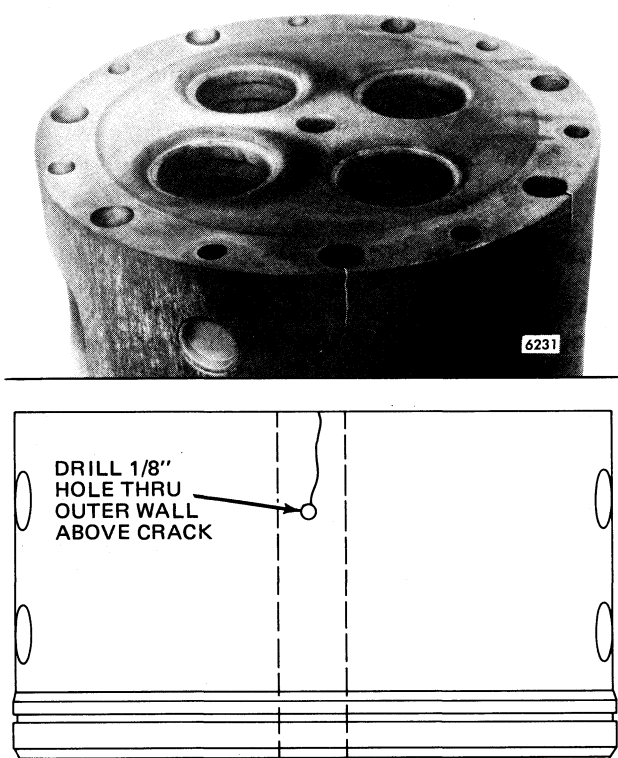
Outside Edge Bolt Hole Cracking (Head Reusable)
